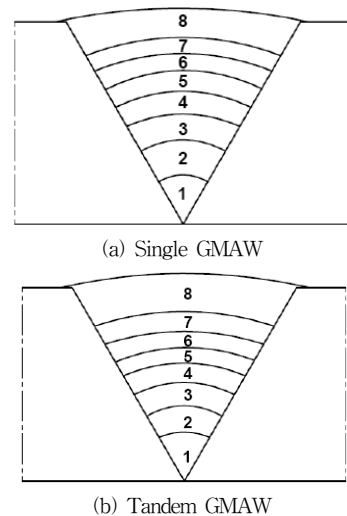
Shapes of cross sections and welding process in each weld specimen
